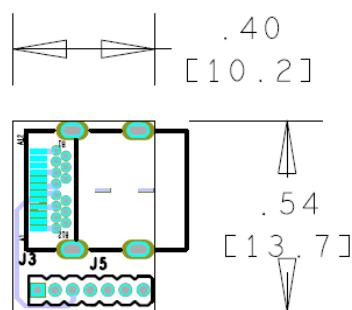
Input Section Daughterboard Printed Circuit Layout, Top.
